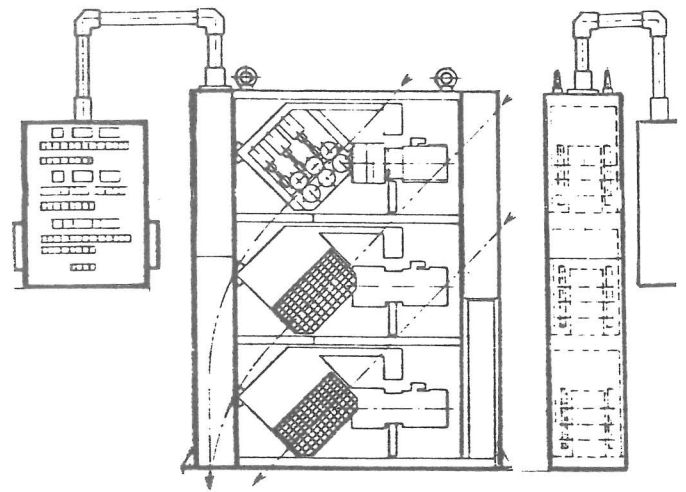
6-strand wire injection machine consisting of 3 dual strand units
